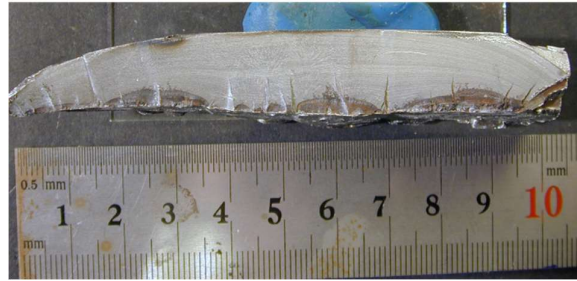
Crack surface of a steel plate, with a fillet weld on the lower side. The dark areas indicate a 2 mm deep hydrogen crack after fabrication, which was the initiation line of the fatigue crack (Vårdal and Moan, 2016).
